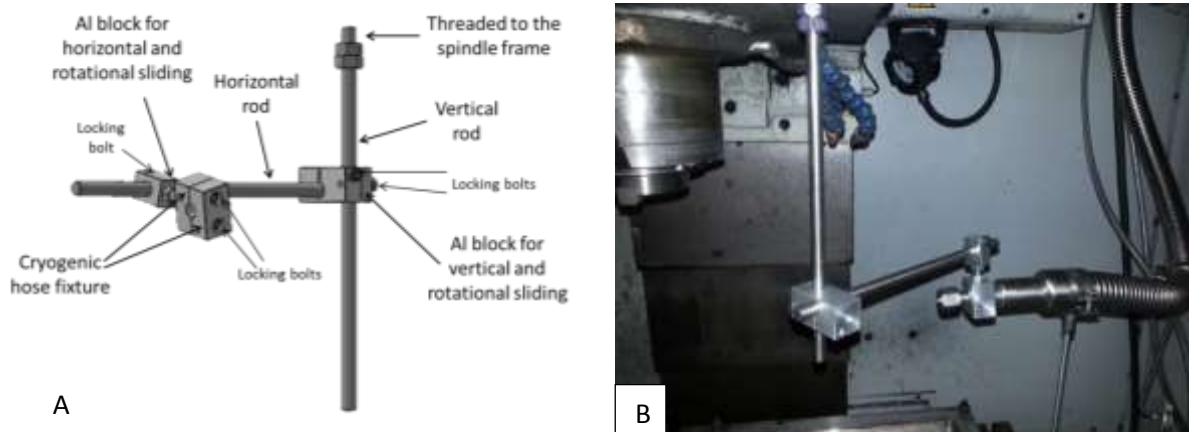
Cryogenic nozzle holder. A) CAD model B) installed in the machine tool and hold the cryogenic hose.
